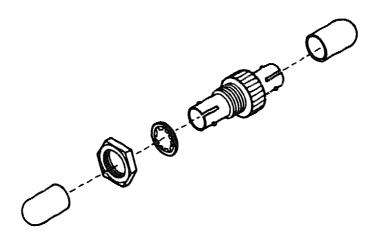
2.5 mm Bayonet ST-Type Connector Pigtail
